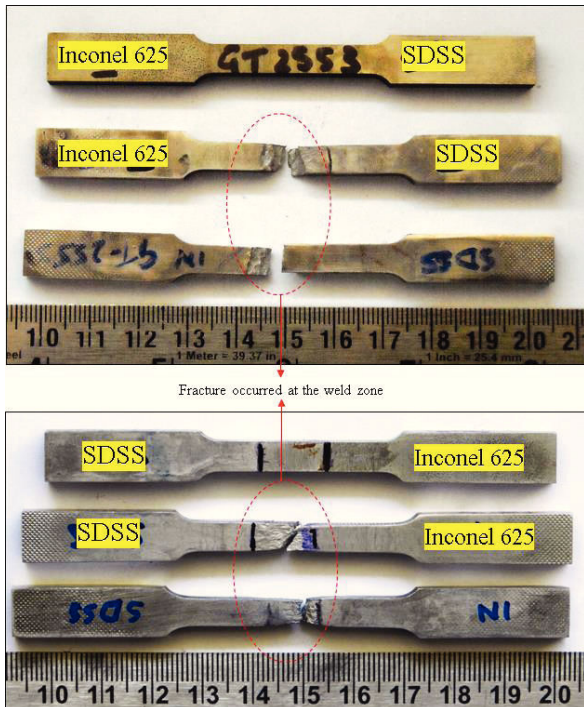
Photographs showing the tensile tested samples of CCGTA welded Inconel 625 and UNS S32750 employing (a) ER2553 and (b) ERNiCrMo-4 filler
